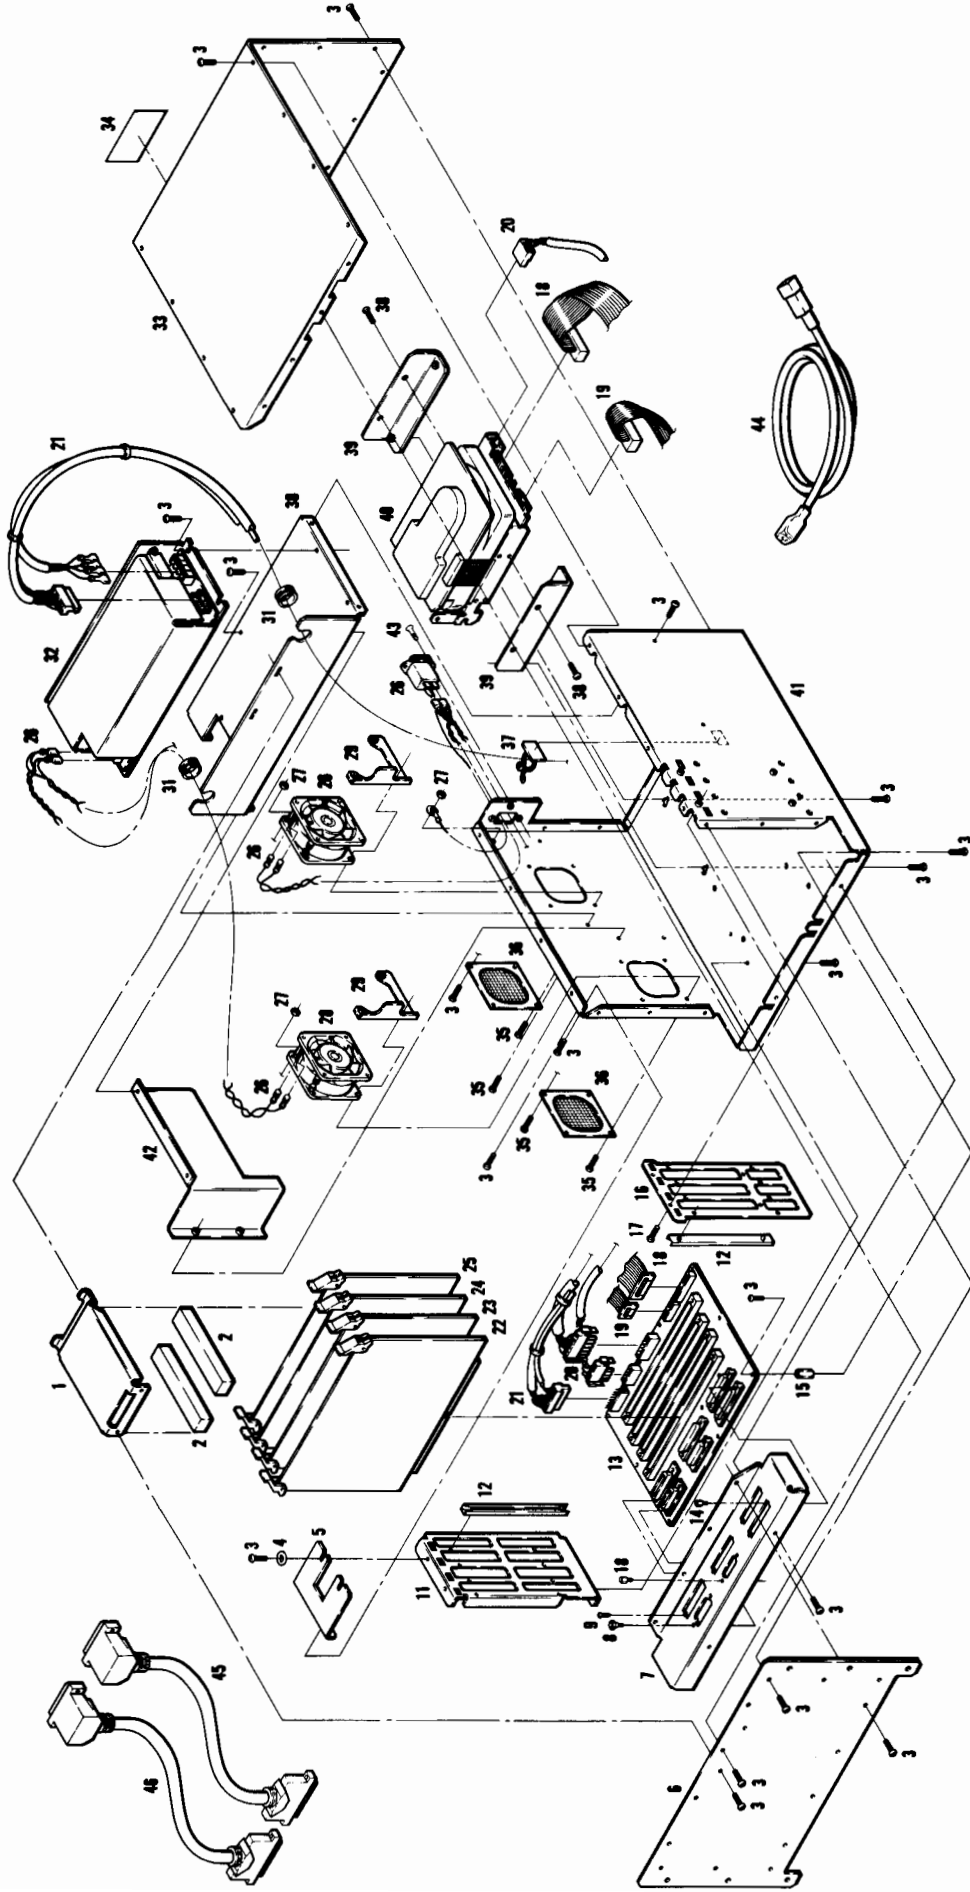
Vector-to-Raster Converter Assembly Illustrated Parts Breakdown
